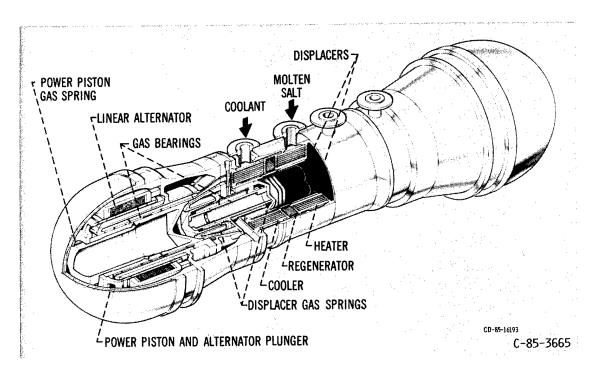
SPACE POWER DEMONSTRATOR ENGINE.
